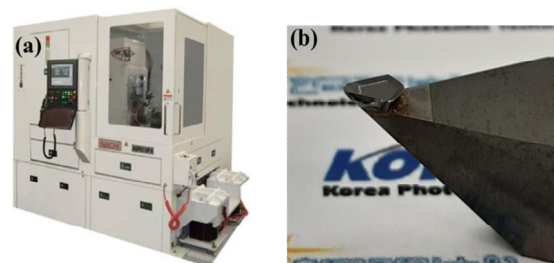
(a) Ultra-precision diamond machine and (b) Diamond tool
